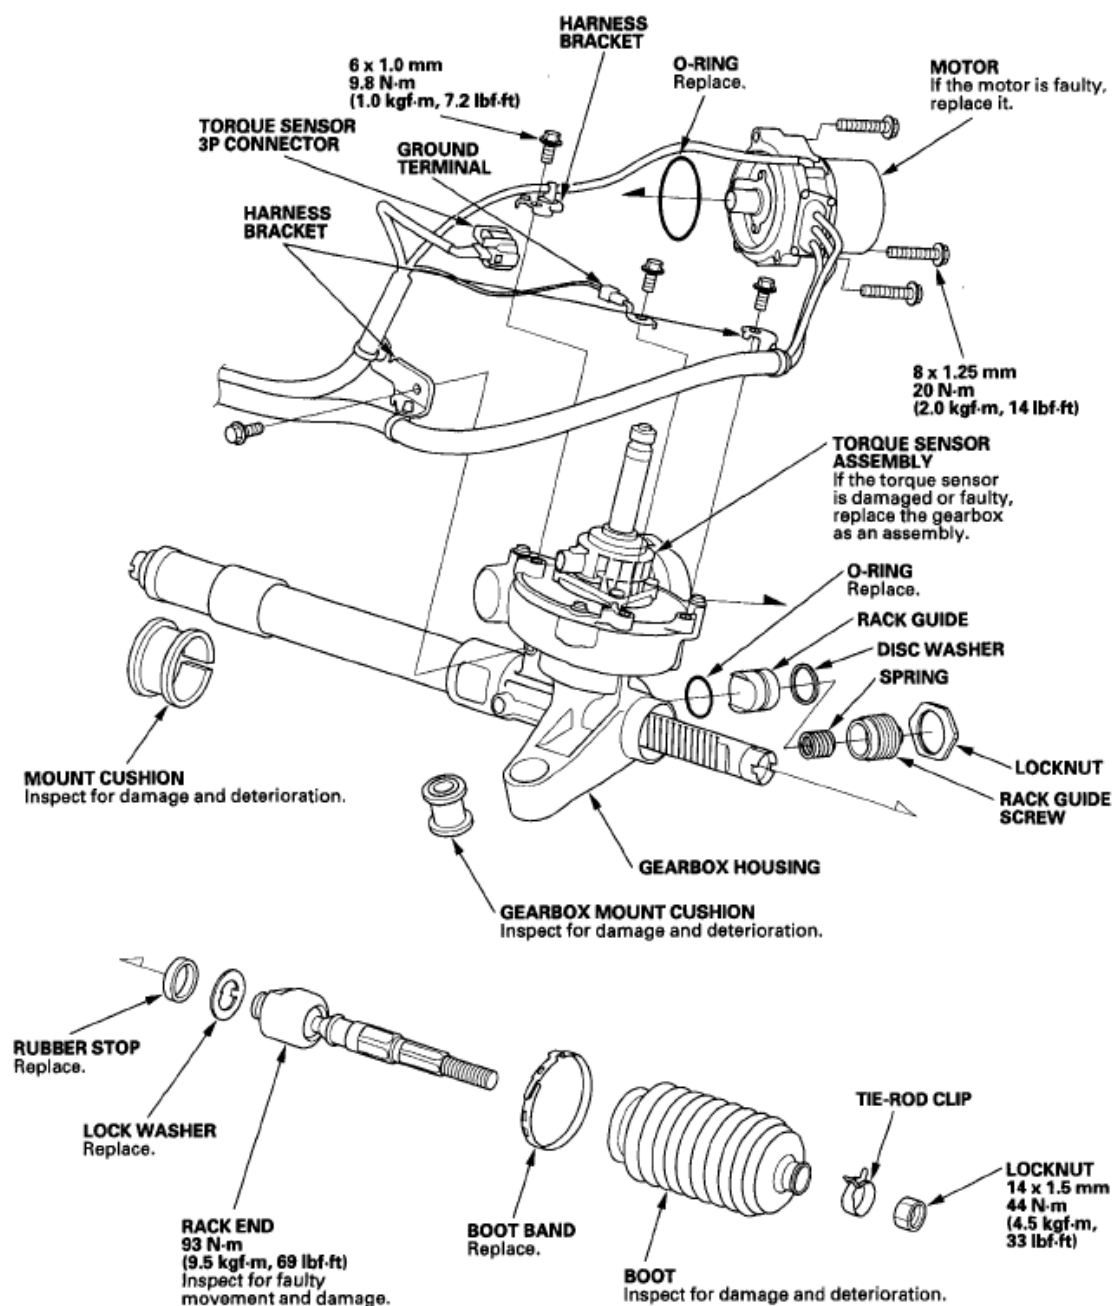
Exploded View Of Rack End Components (With Torque Specifications)
